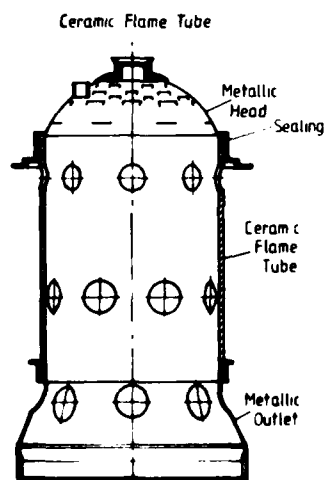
Ceramic Flame Tube for Vehicular Engine Test
